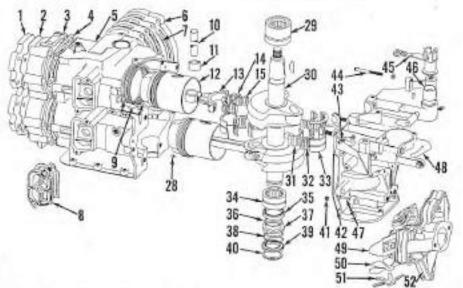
Exploded view of power head used on late models. Early models are similar,
